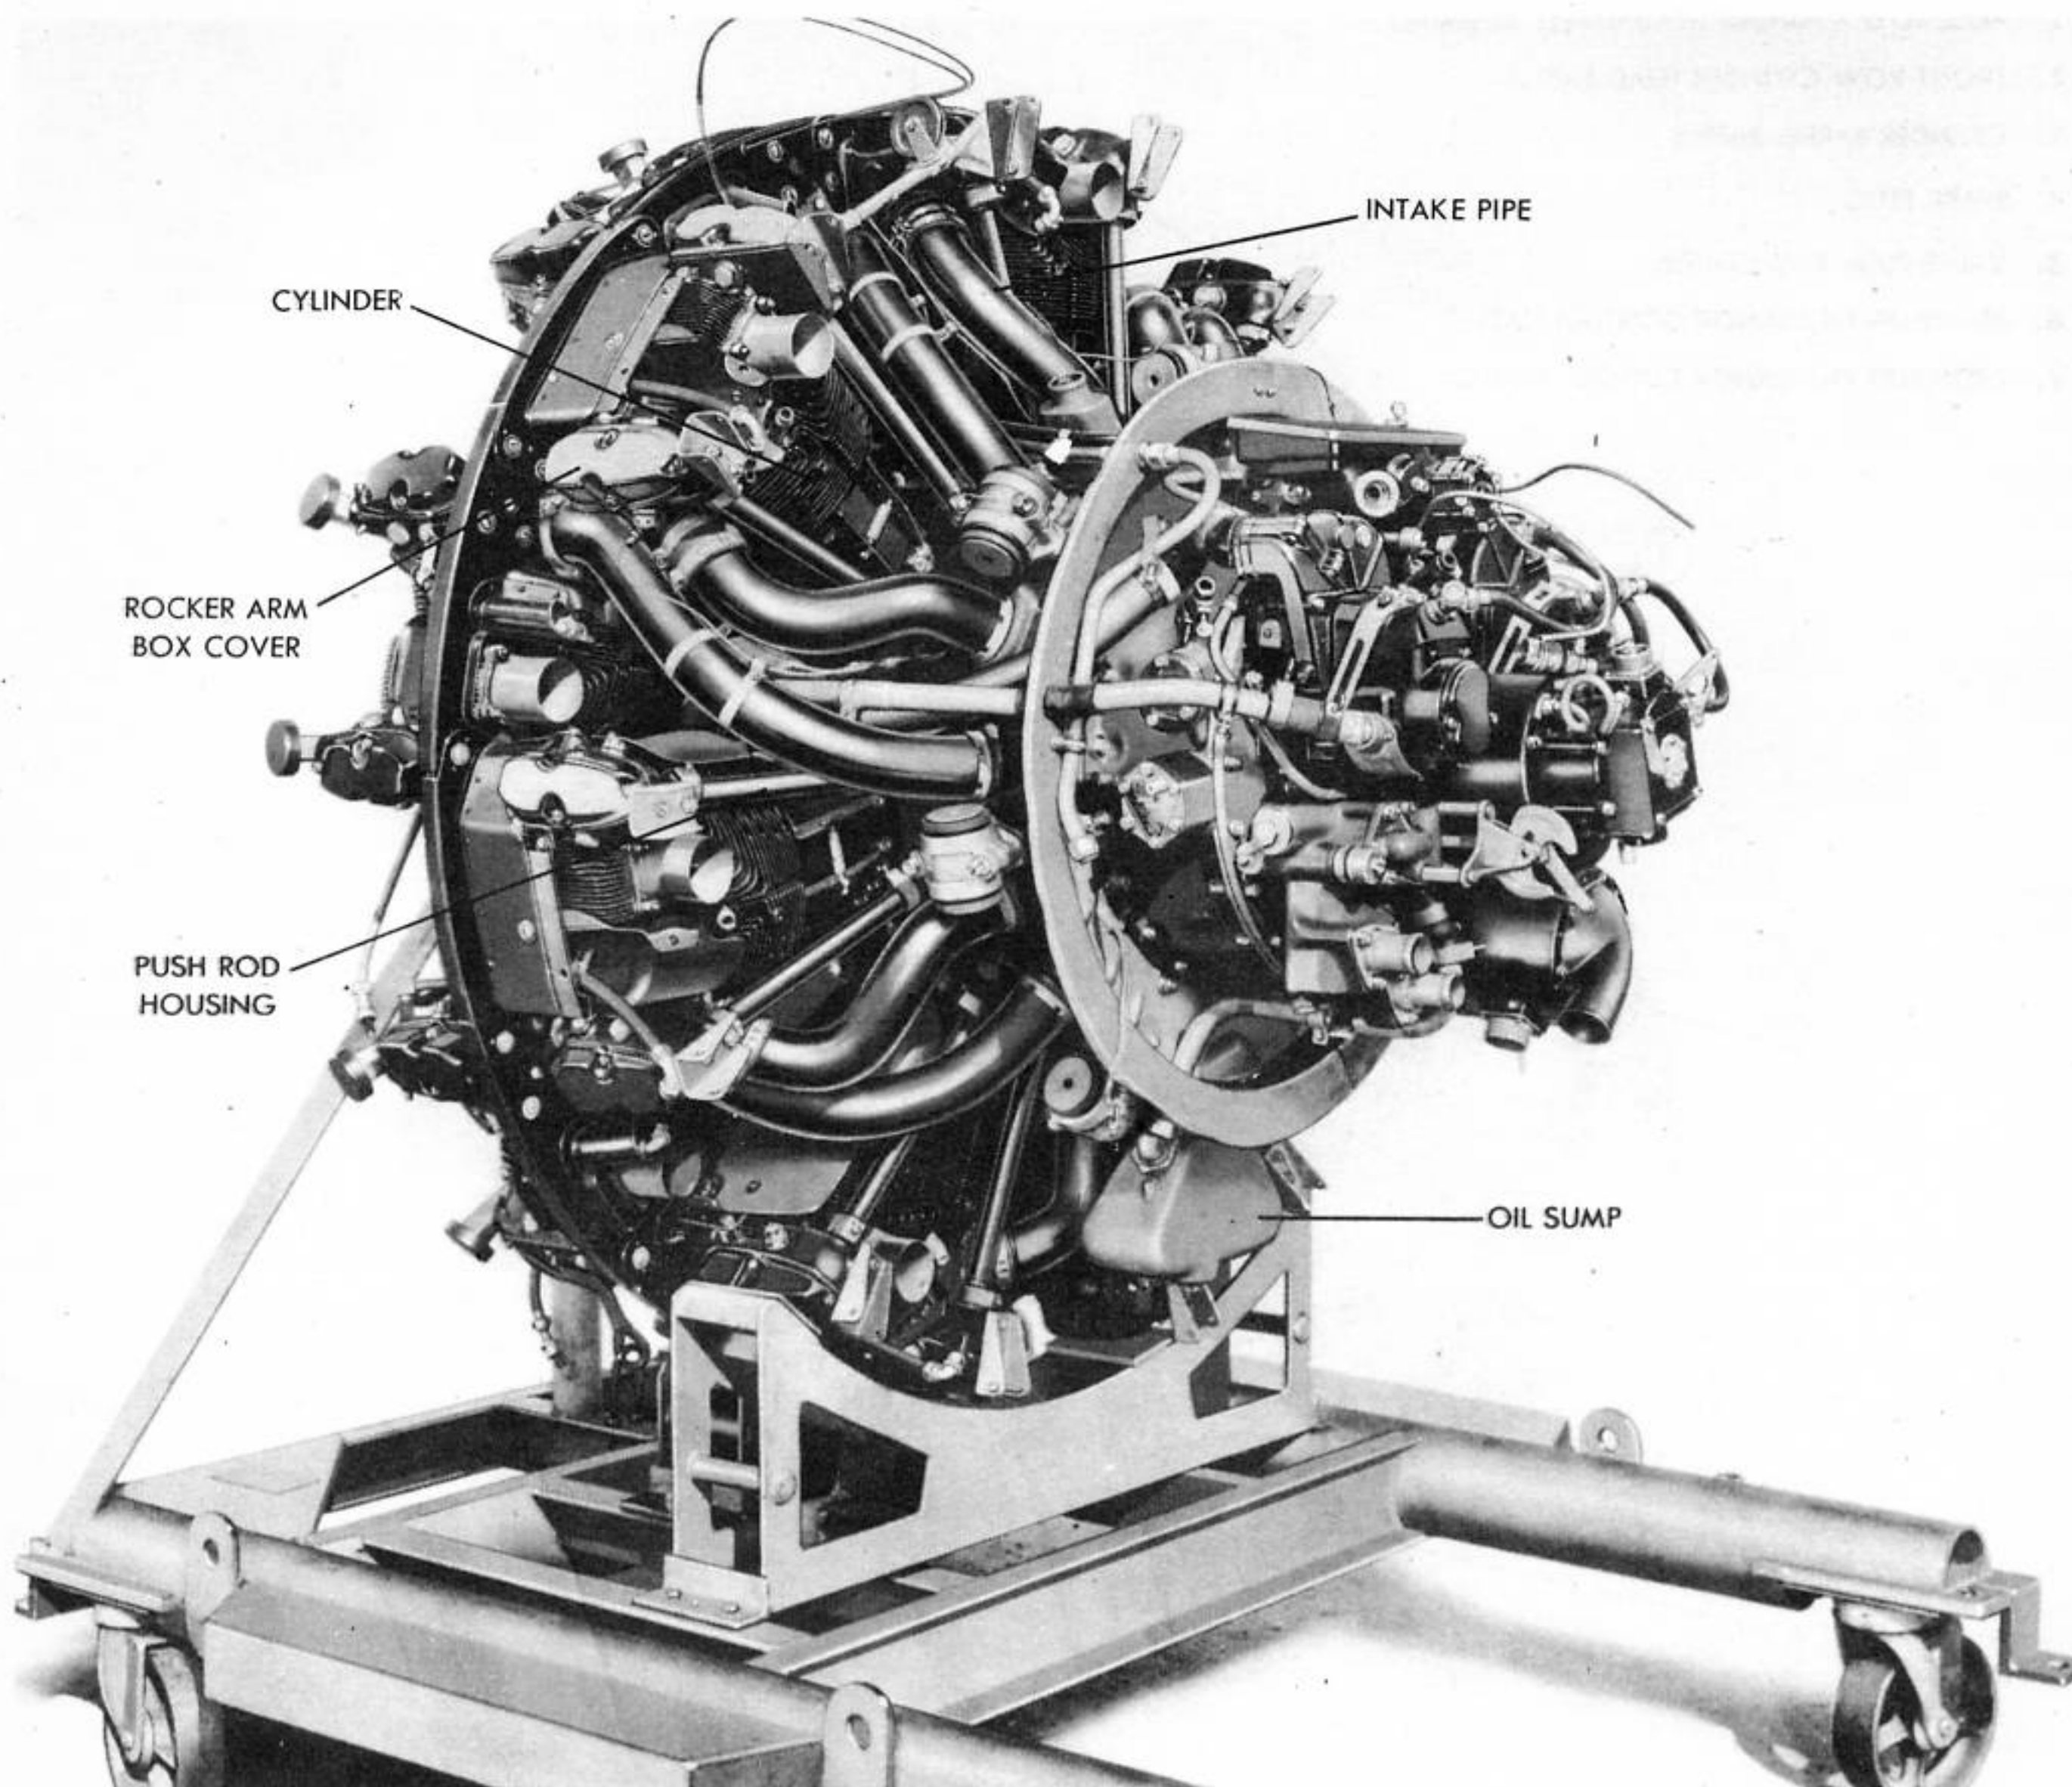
RIGHT REAR VIEW OF REMOVED ENGINE
